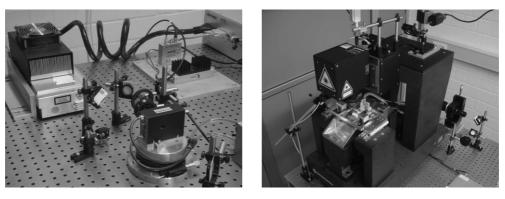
Optical setup with laser source and AOM (left image), and hard stone machining system with a laser scanner head, high-precision translation stages and processing chamber (right image).
